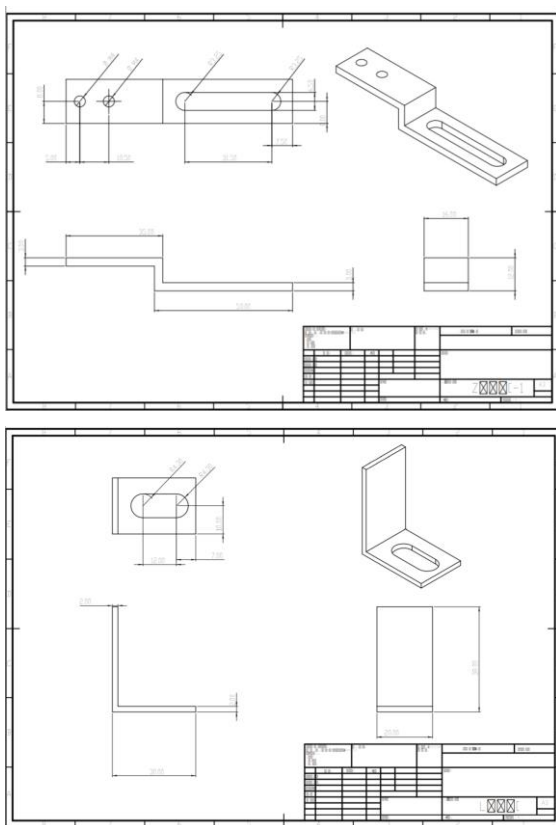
Engineering Design of Z-shaped Bracket & L-shaped Bracket
